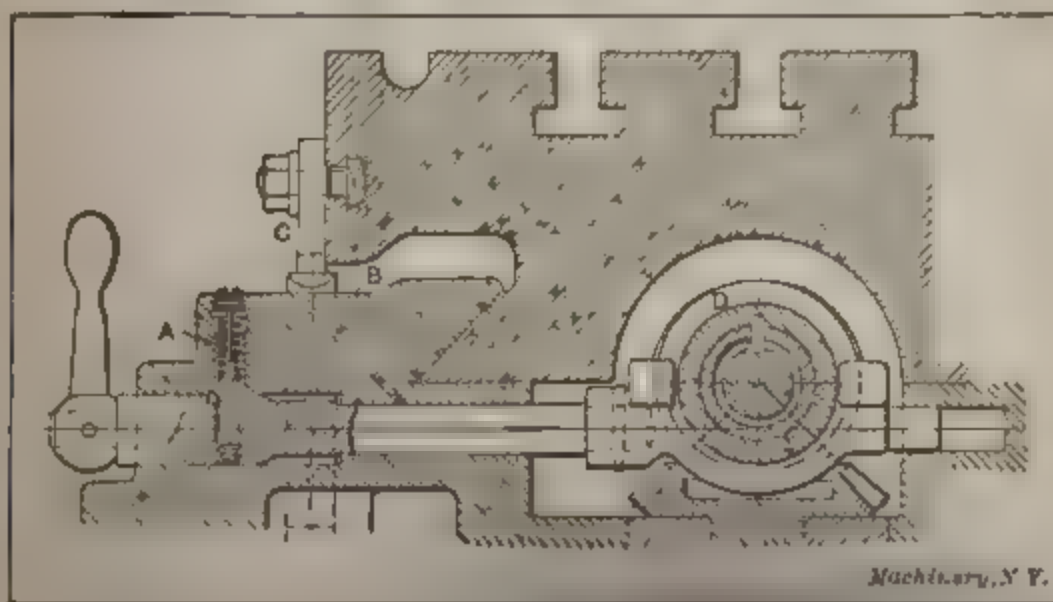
Locking Mechanism for Clutch for Milling Machine Feed screw
